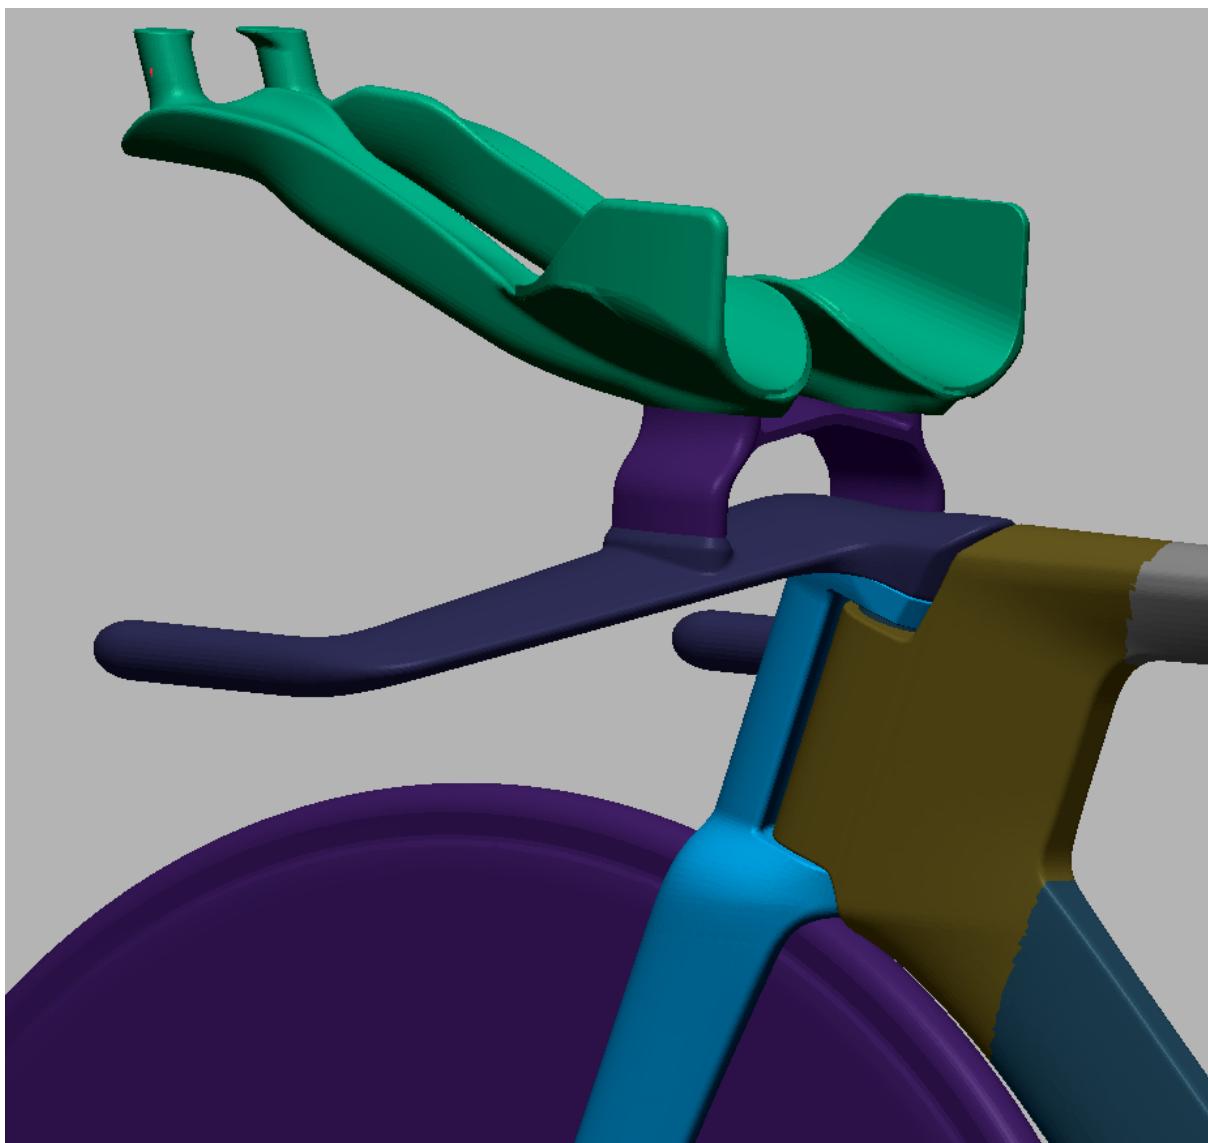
Argon 18 pursuit bike front end assembly, rear iso view
